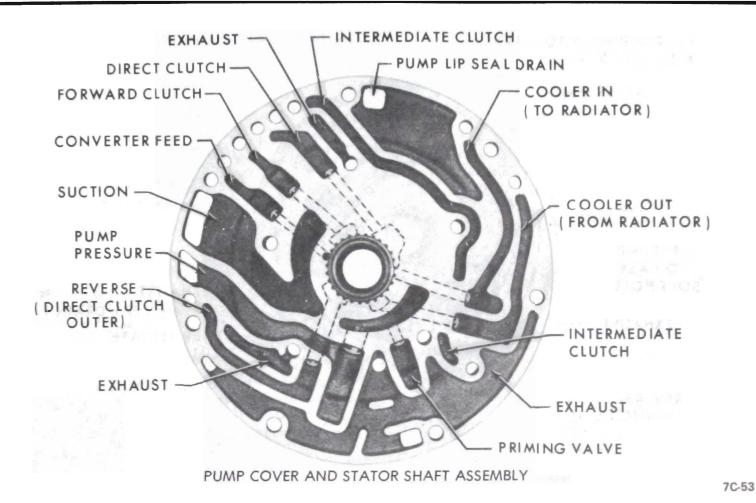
C-53 - Identification of Oil Channels in Pump Cover and Stator Shaft Face
